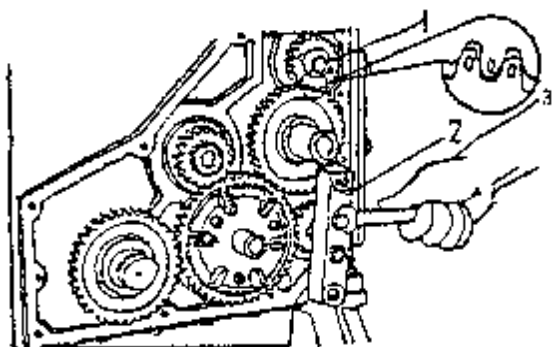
Arrangement of gear train (tooth- mesh- makes must be lined up) and dismantling of balancing shaft gear by means of a puller
